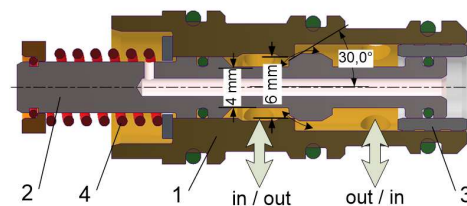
NC* type seat valve; 1—body, 2—poppet, 3—sleeve, 4—spring.
